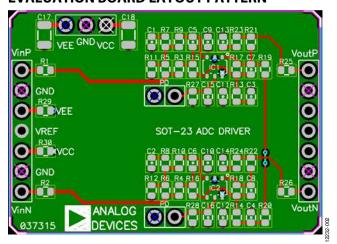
6-Lead SOT-23 ADC Driver, Component Side
